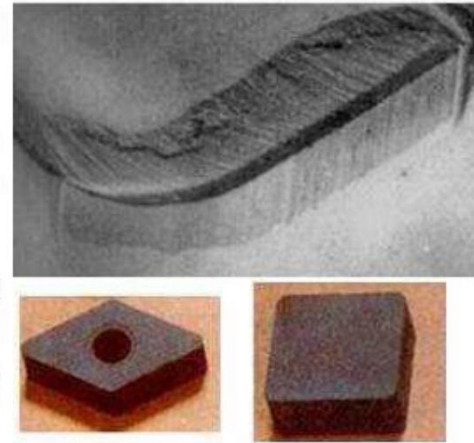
(c) Photographic view of the wear pattern of a turning tool insert
